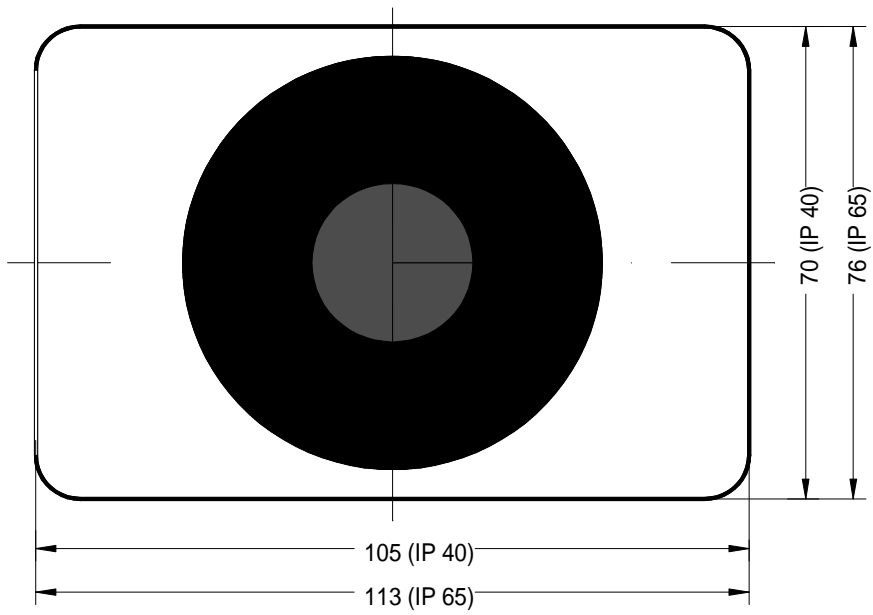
ATMION™ Wide Range Manometer Compact Version (front view on flange)
